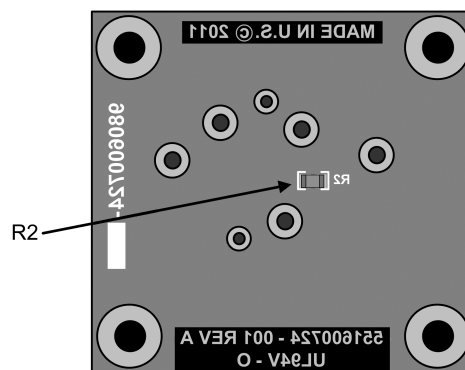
Bottom Side Part Placement, as Viewed from the Top
